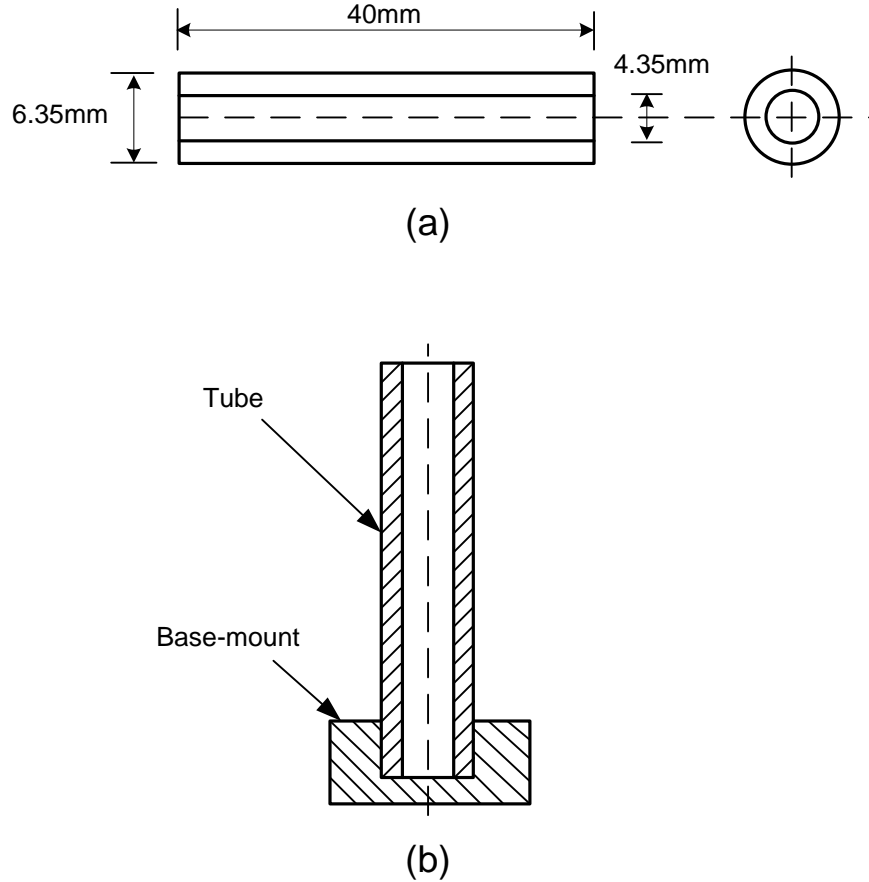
Detailed drawing of the platinum sintering crucible including Pt tube and base-mount: (a) dimensions of tube, (b) sectioned assembly view (adapted from [52]).
